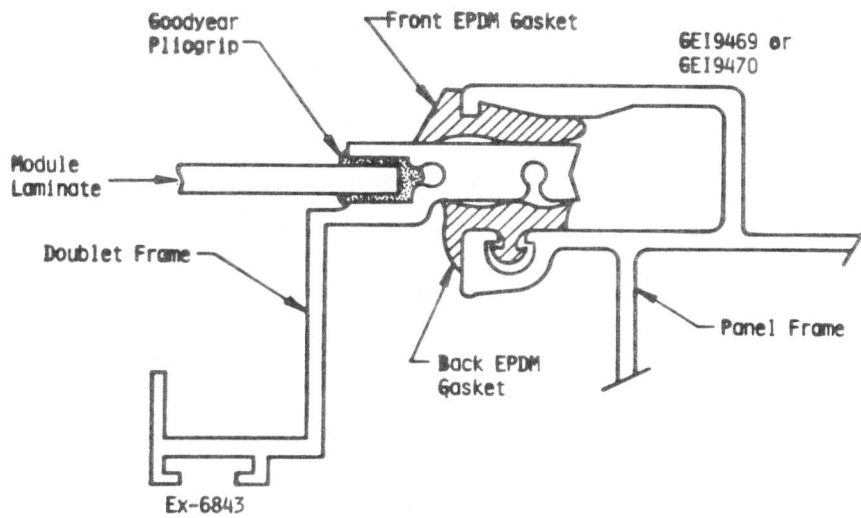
Cross Section of Panel Showing Doublet Gasketing Details
